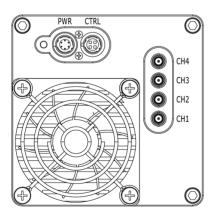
VP-65MX-31 I F-mount Mechanical Dimension
